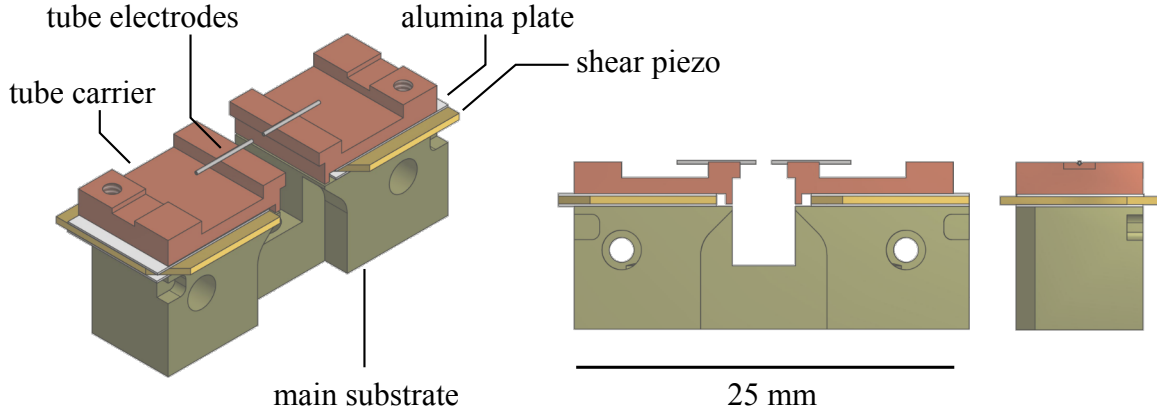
CAD drawing of the monolithic cavity mounting structure.
